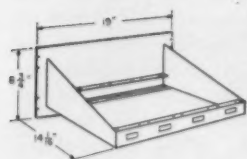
RACK Mounting Kits enable quick assembly of laboratory power supplies.
